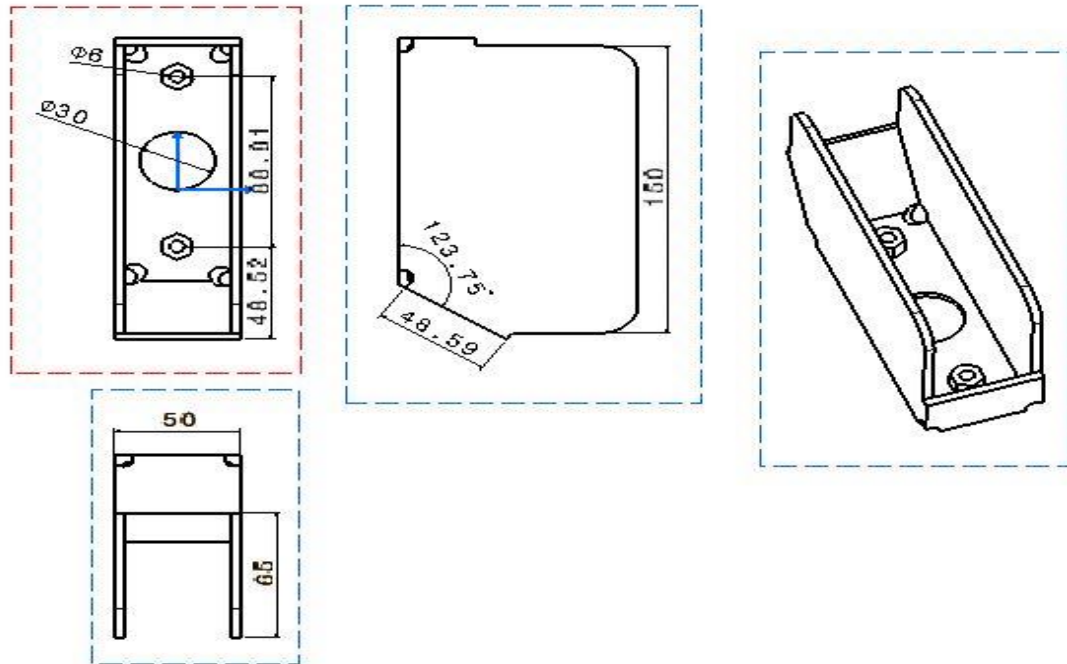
shows the detail description of the mounting bracket of the existing design.
